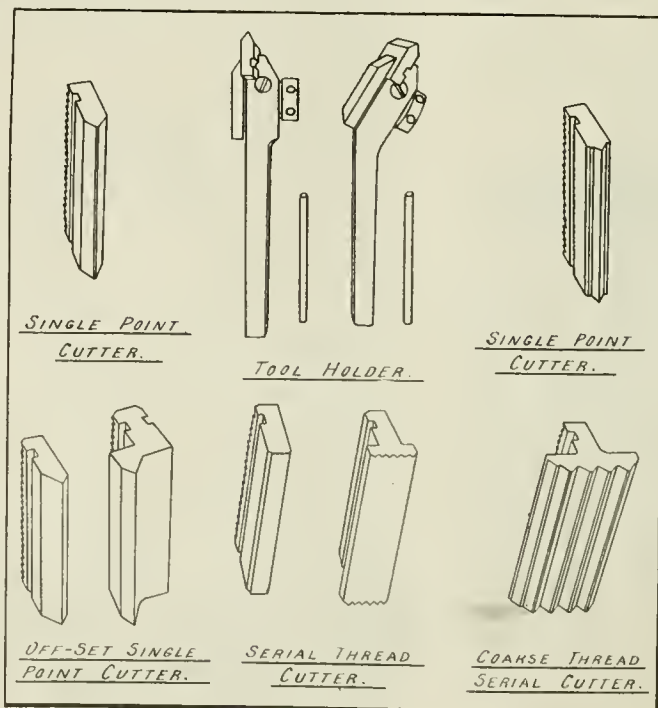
STANDARD TYPE OF THREADING TOOL AND HOLDER.
